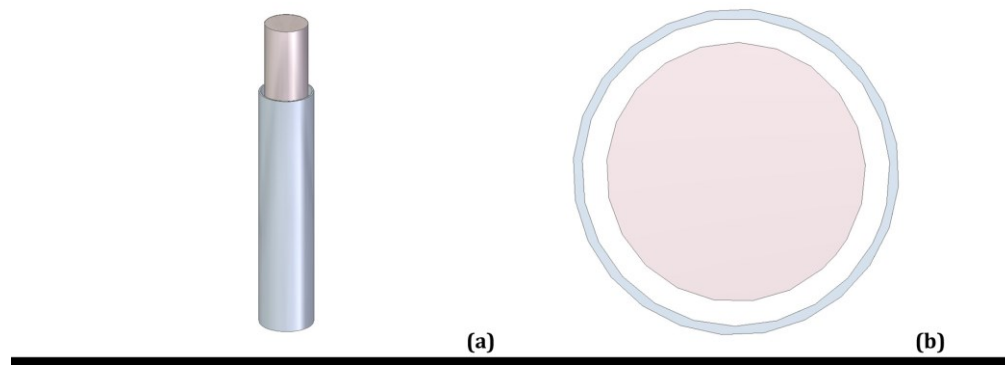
Model of the ECM system. (a) Isometric view of the array, (b) Top view of the array. The tool (pink cylinder) is placed concentric to the workpiece (blue ring). The interelectrode gap is the white area between the tool and the workpiece in (b).
